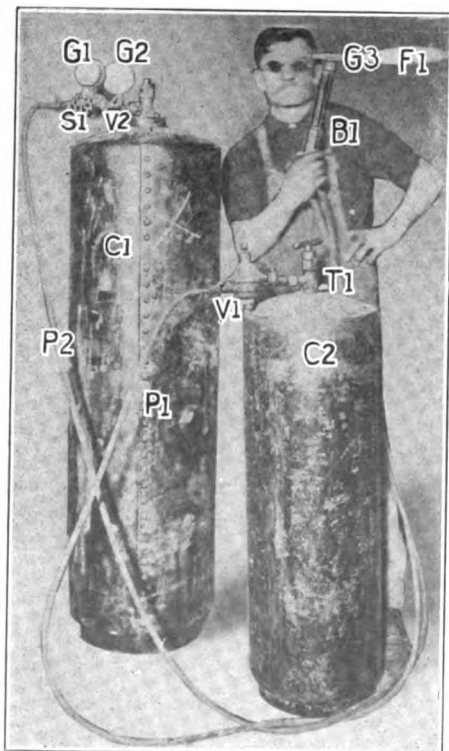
Welding equipment, showing oxygen and acetylene tanks, gauges, valves, etc.
